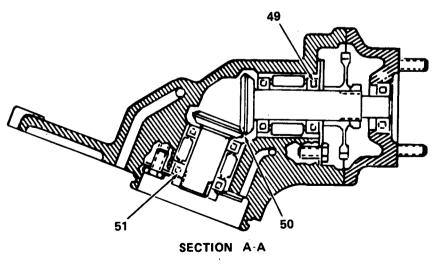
Fits, Clearances and Backlashes (T53-L-11 Series Engines) (Sheet 5 of 5)
